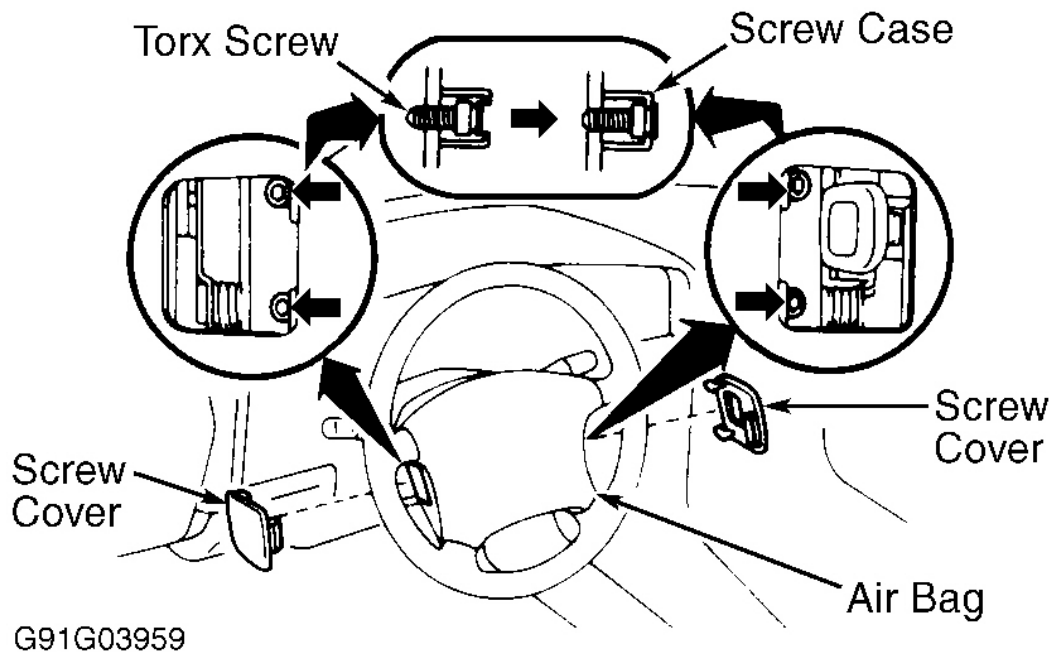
Removing Air Bag From Steering Wheel (Typical)
